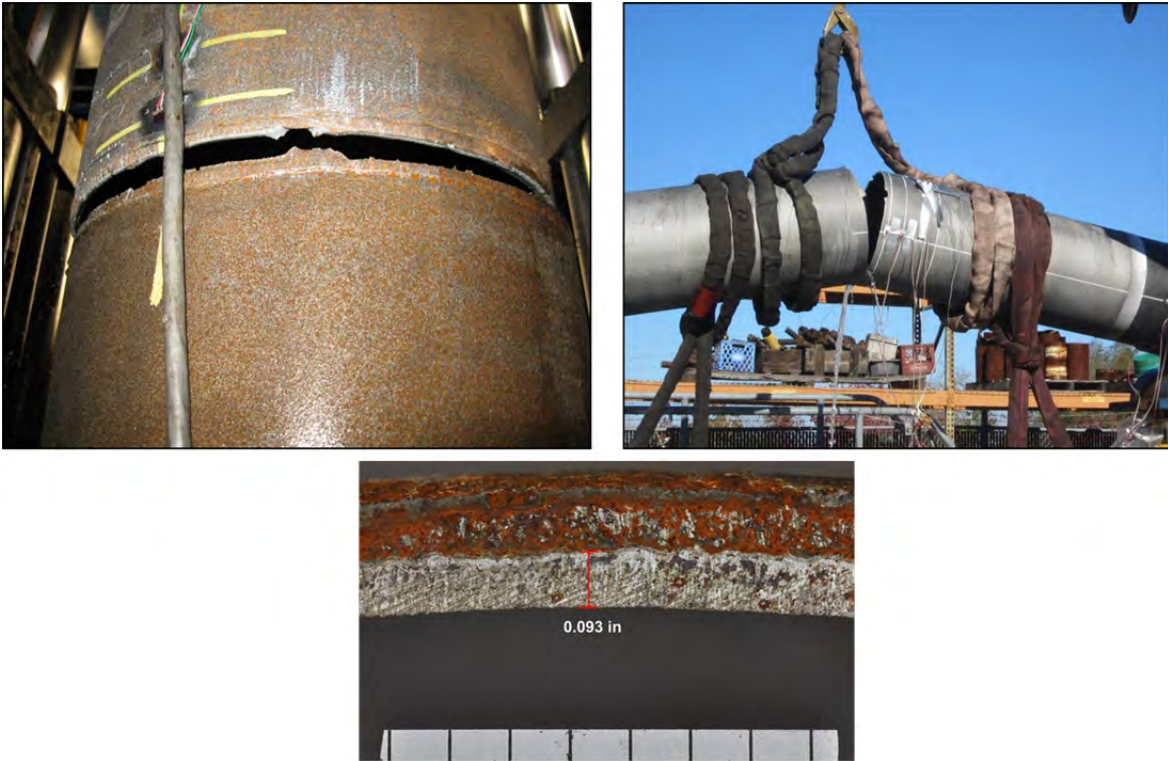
Photograph showing test results for reinforced MATR-3-7 girth weld samples (Lower image shows a cross-section of the failed girth weld illustrating region with lack of penetration)
